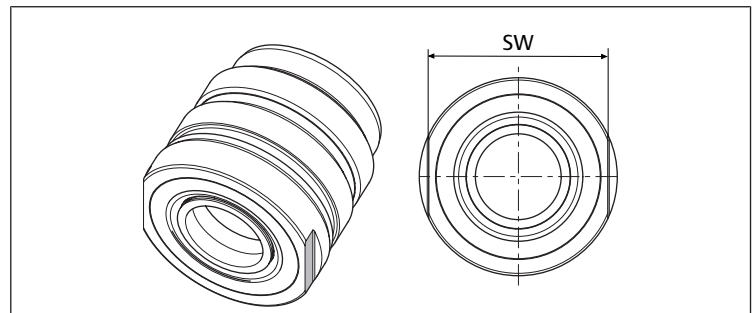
Ø 32-63 mm | Modular scraper system with wrench flats
